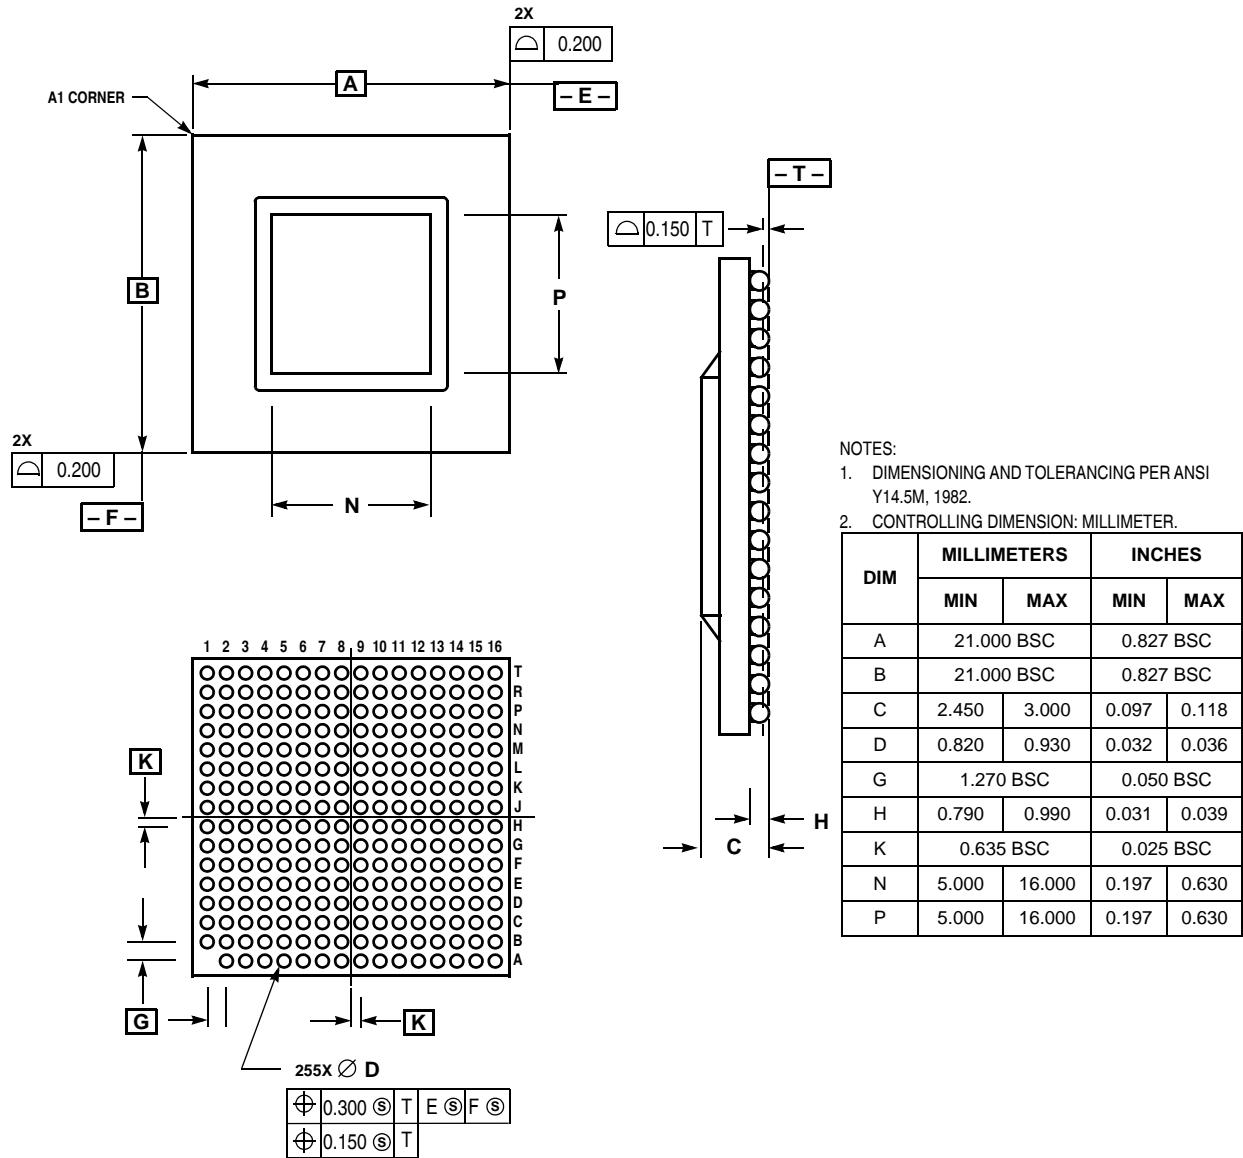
Mechanical Dimensions and Bottom Surface Nomenclature of the CBGA Package
